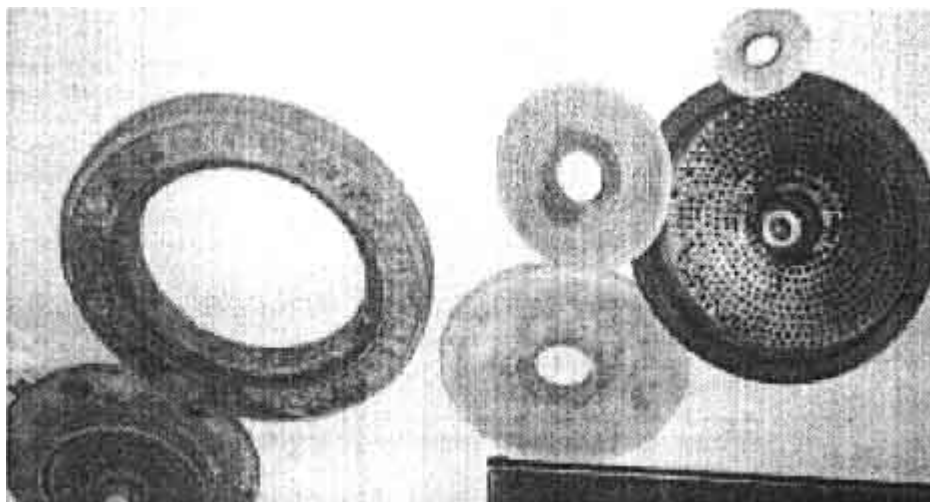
Waste Valve, Retainer Ring and Rubber Parts of Adami-Tulu Hydraulic Ram Pump
